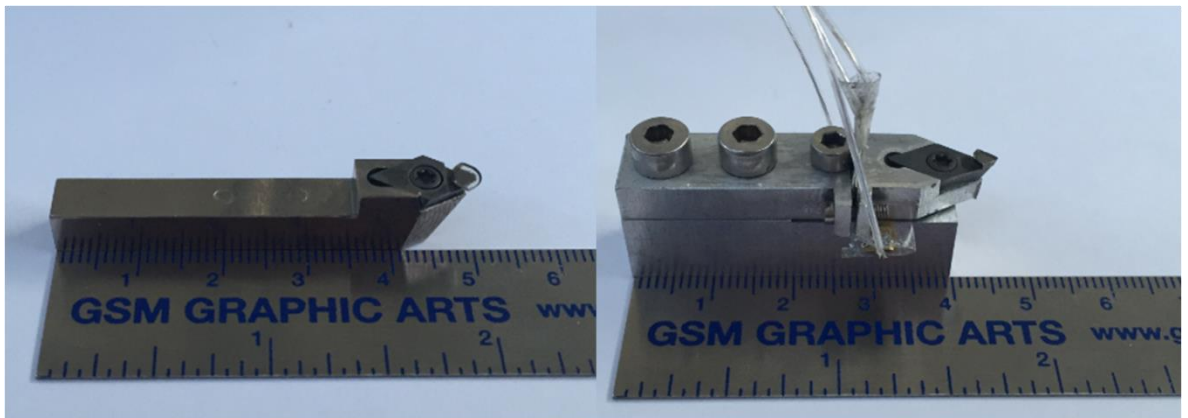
Diamond micro-cutting tool and diamond smart cutting tool comparison
